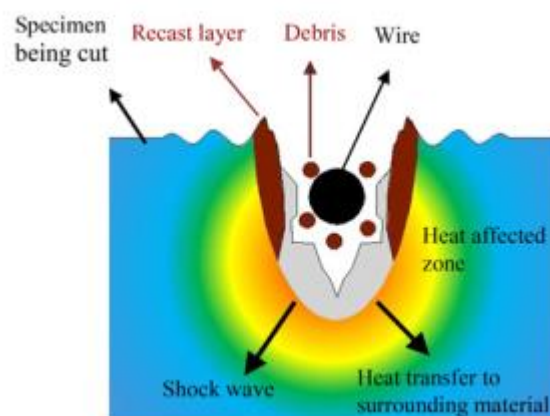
9: Schematic drawing of the EDM process showing the moving wire, debris, re-cast layer and HAZ [30].
